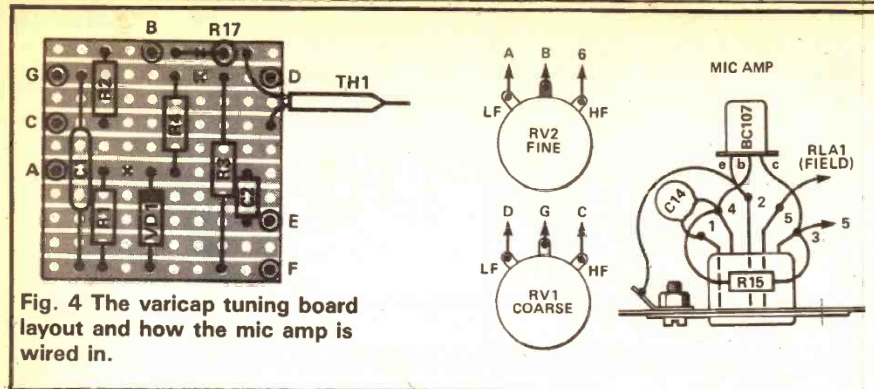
The varicap tuning board layout and how the mic amp is wired in.
